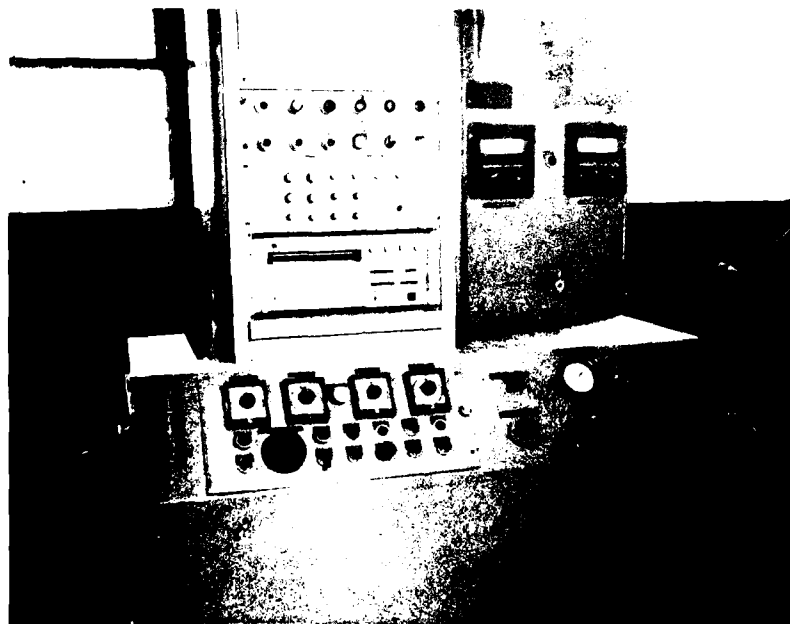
Instrumentation Monitor Console for Measuring and Recording Machine Casting Unit Process Parameters
